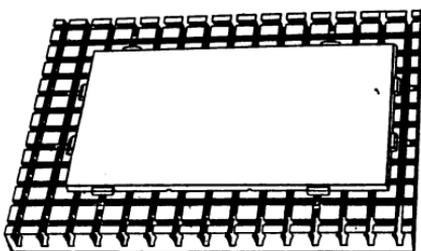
Plate fastened to grooved block by screw and wedge catches.
